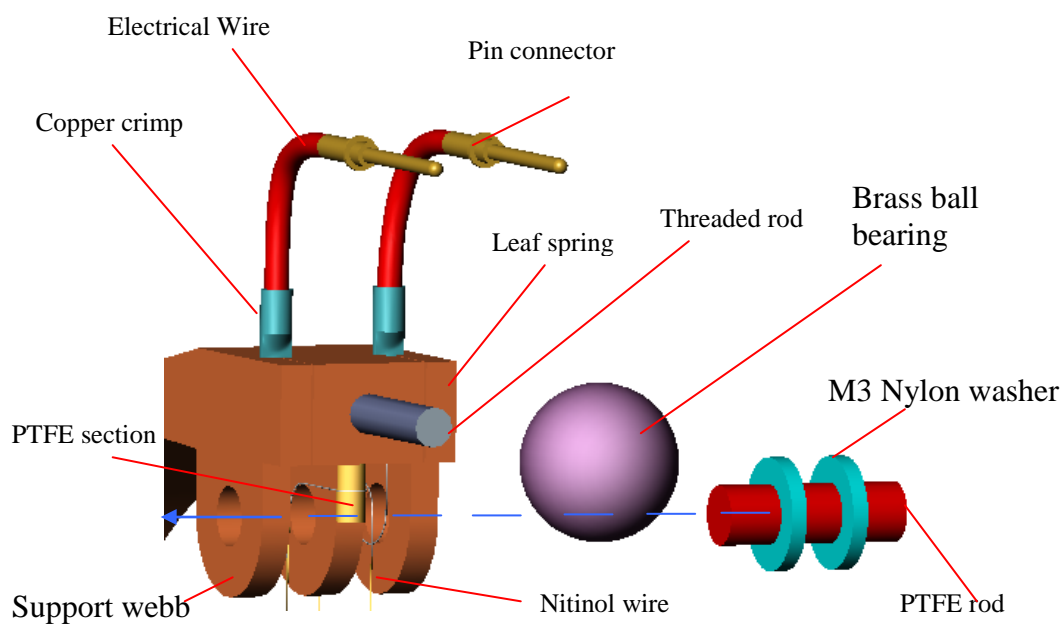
A close up view of the end of the spring with the ball joint disassembled.
